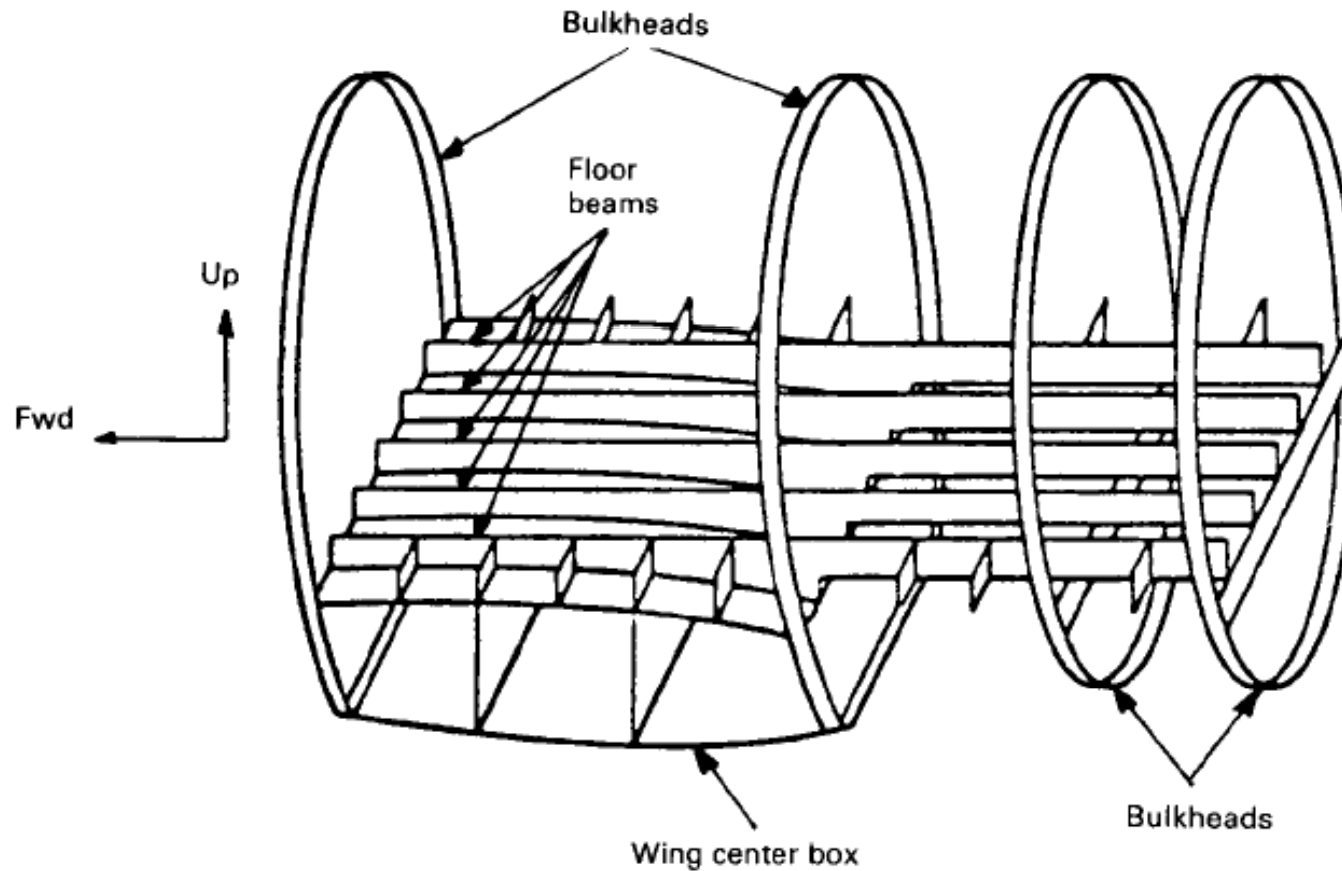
Typical transport fuselage center section floor beams arrangement.
